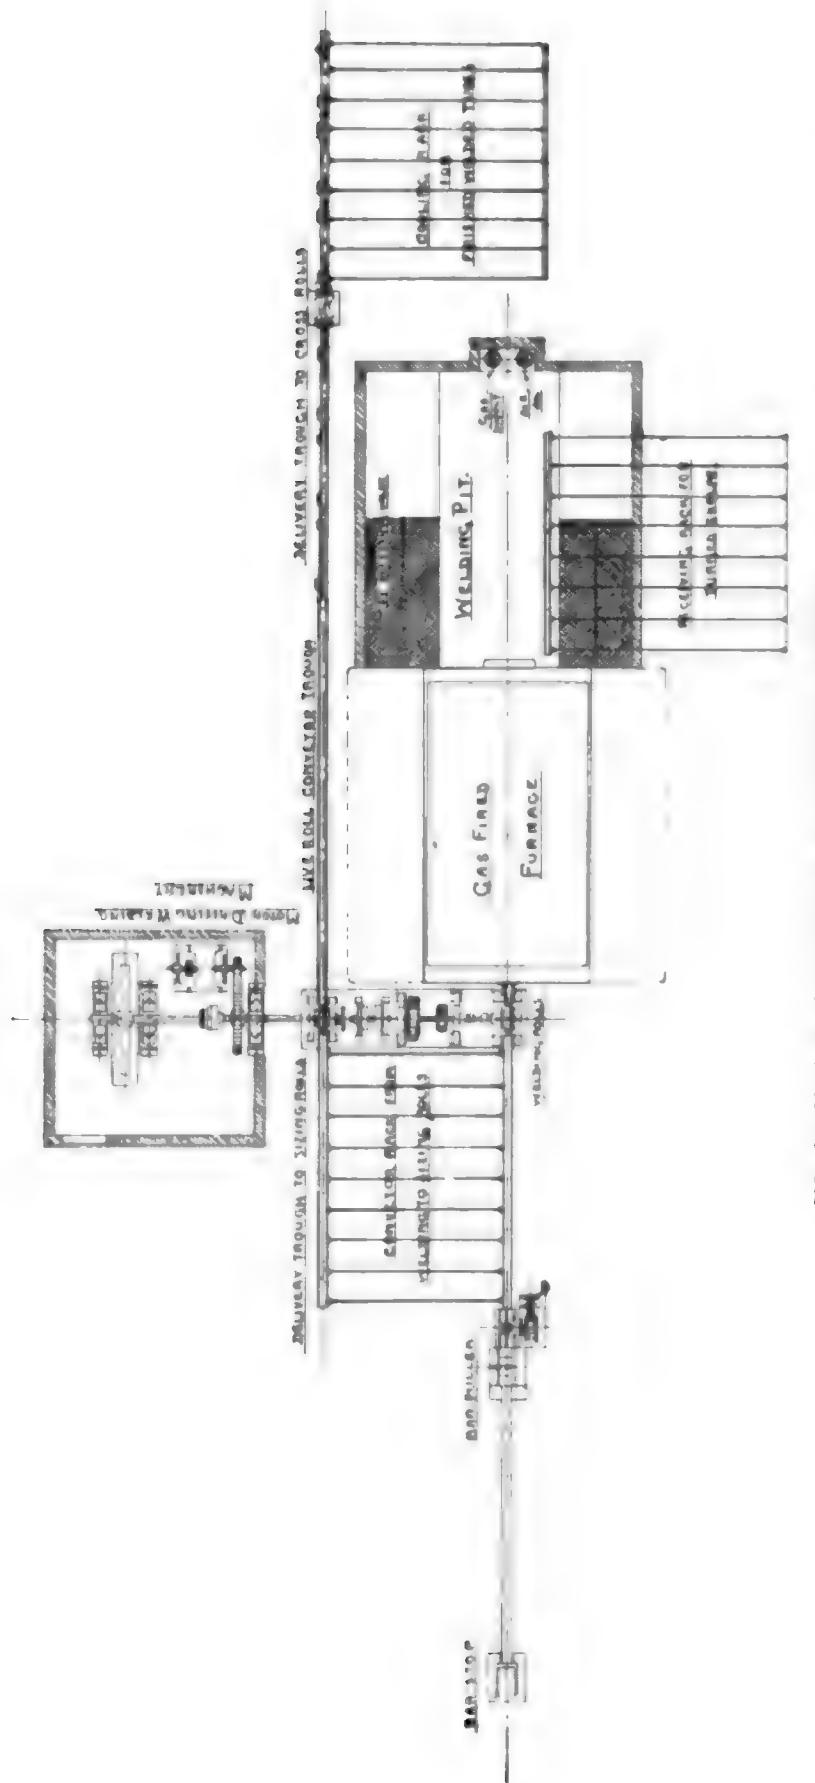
PLAN OF LAP-WELDING MILL—FURTHER PORTION.
